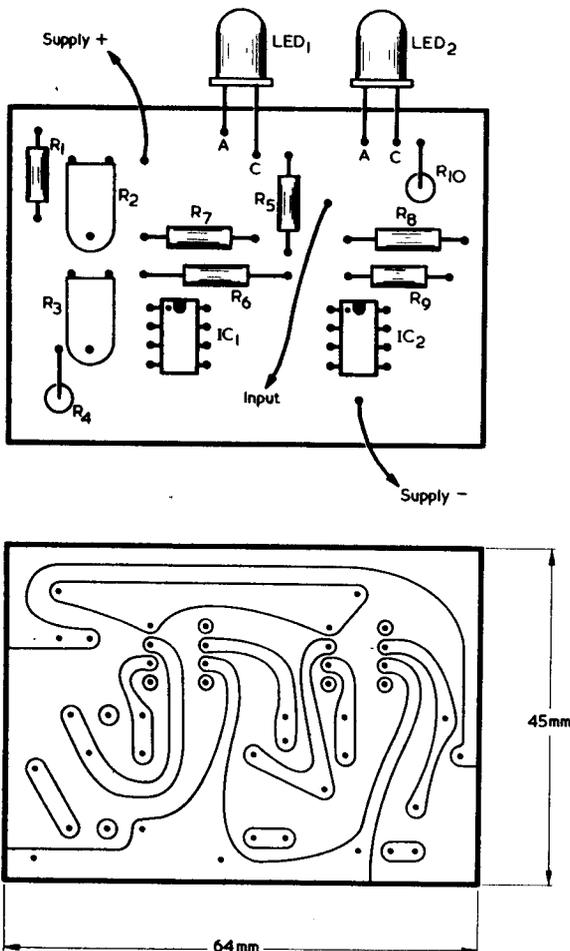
The tuning indicator is assembled on a small printed circuit board. This is reproduced full size here
